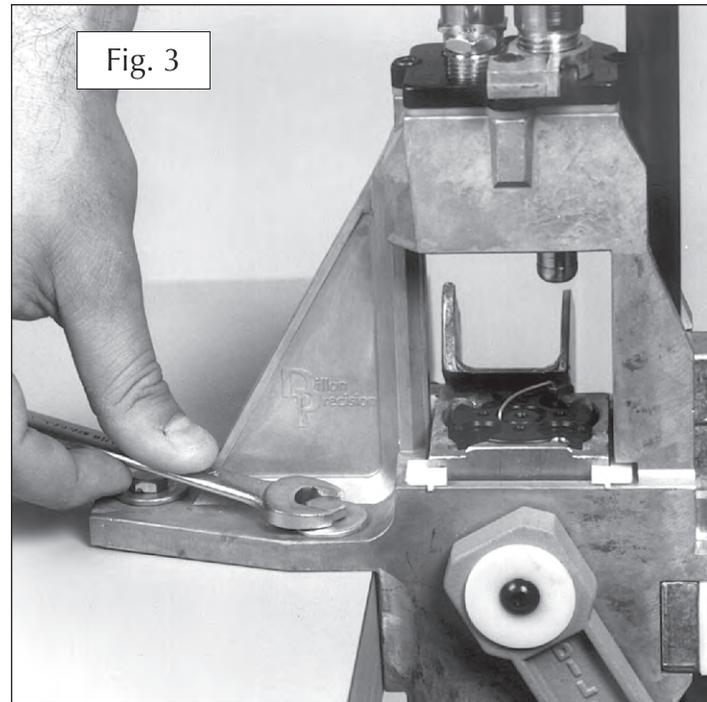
Drill the mounting holes and secure the Square Deal "B" to your bench, using 1/4" bolts (not supplied).
